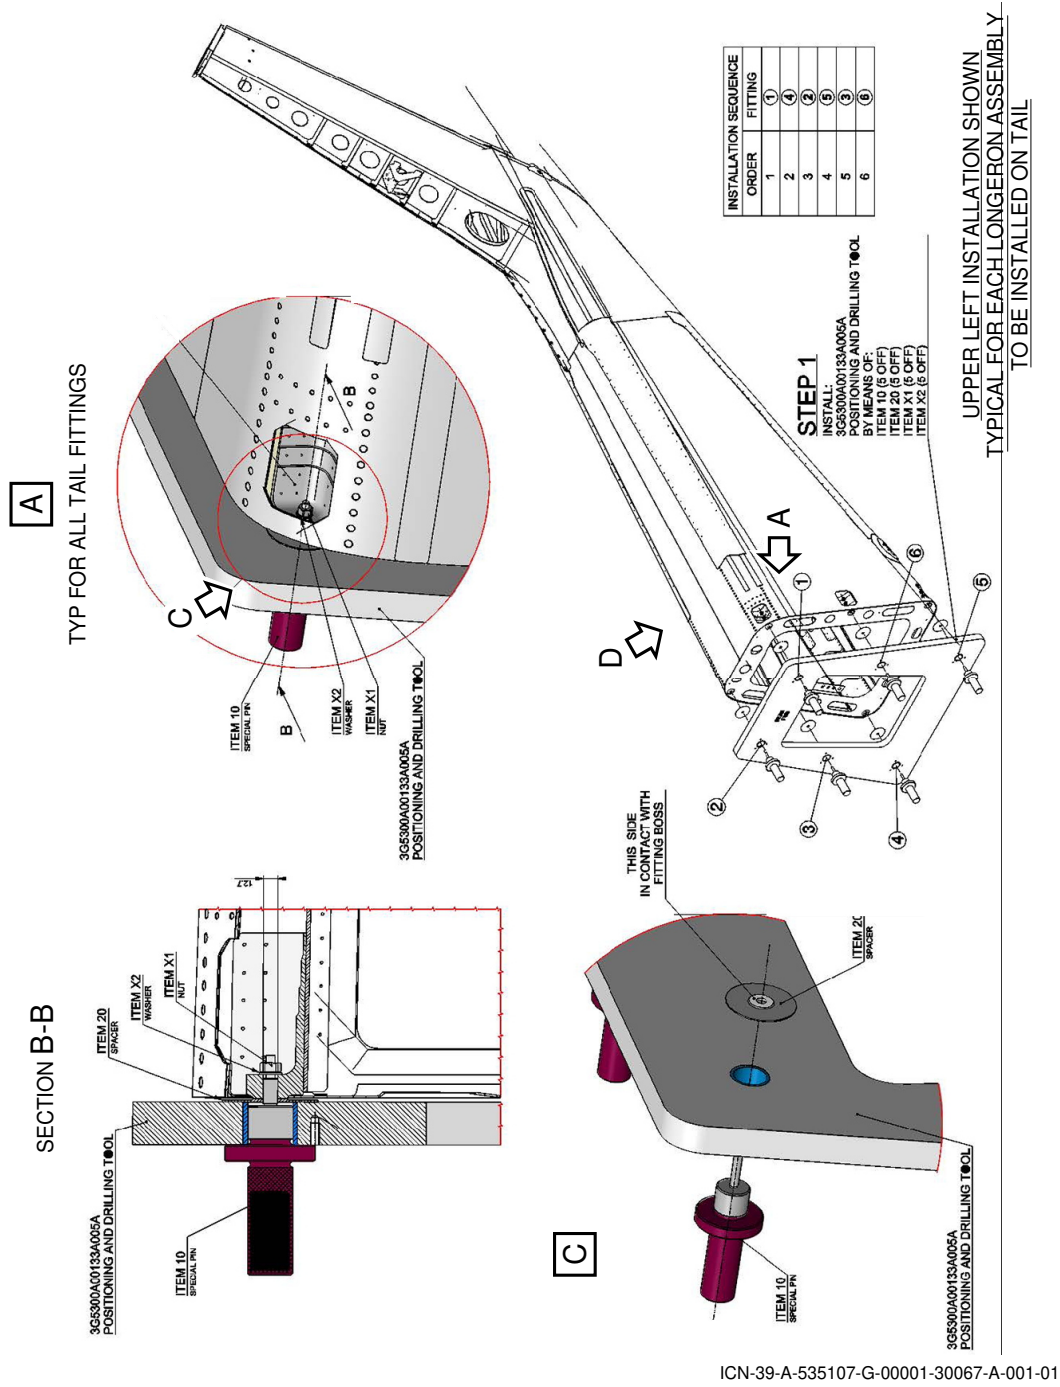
(Sheet 2 of 10) Use of the positioning and drilling tool kit
